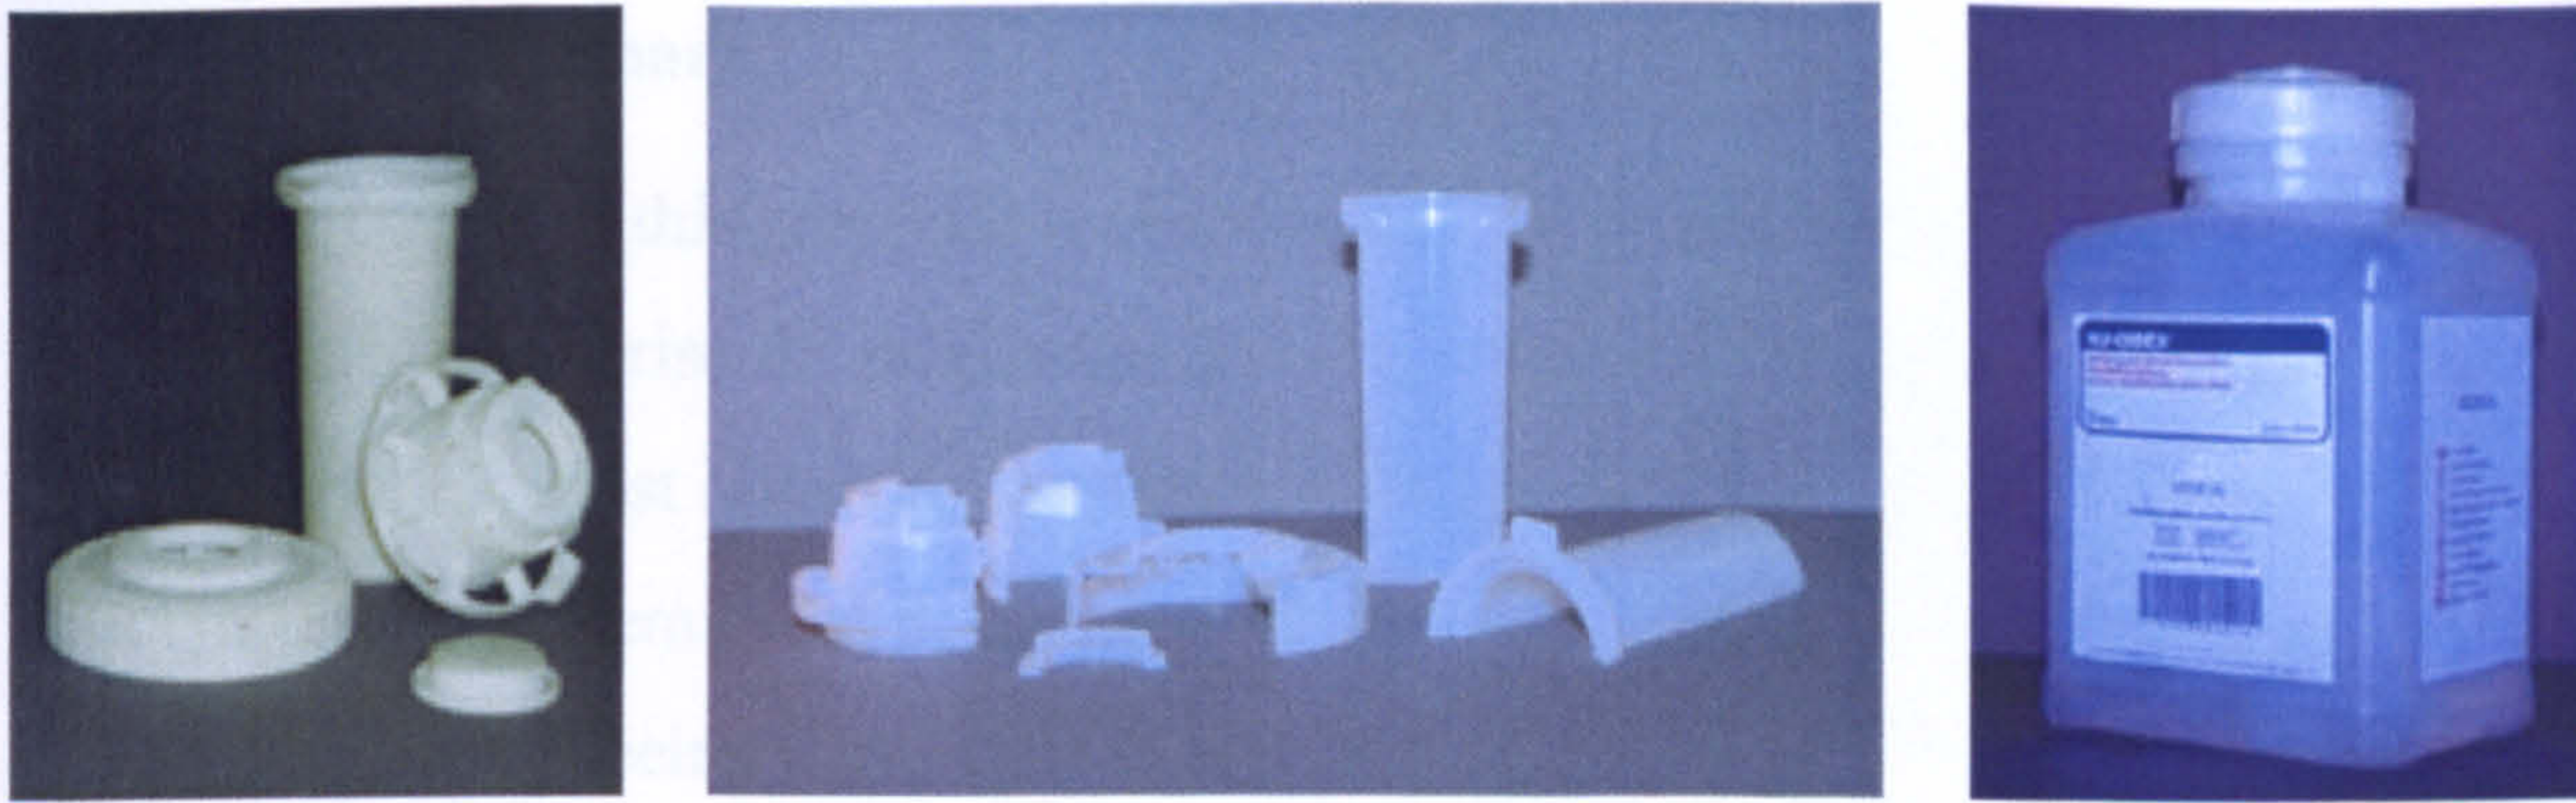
Left: SLS rapid prototype parts. Middle & right: Off tool plastics.
